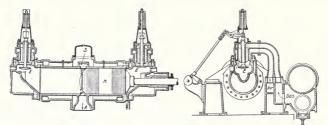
Section through Cylinder (at left) and through Inlet Valve (at right) of Koerting Gas Engine.
